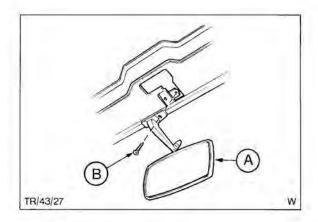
Mirror and arm assembly to header bar A – Mirror
